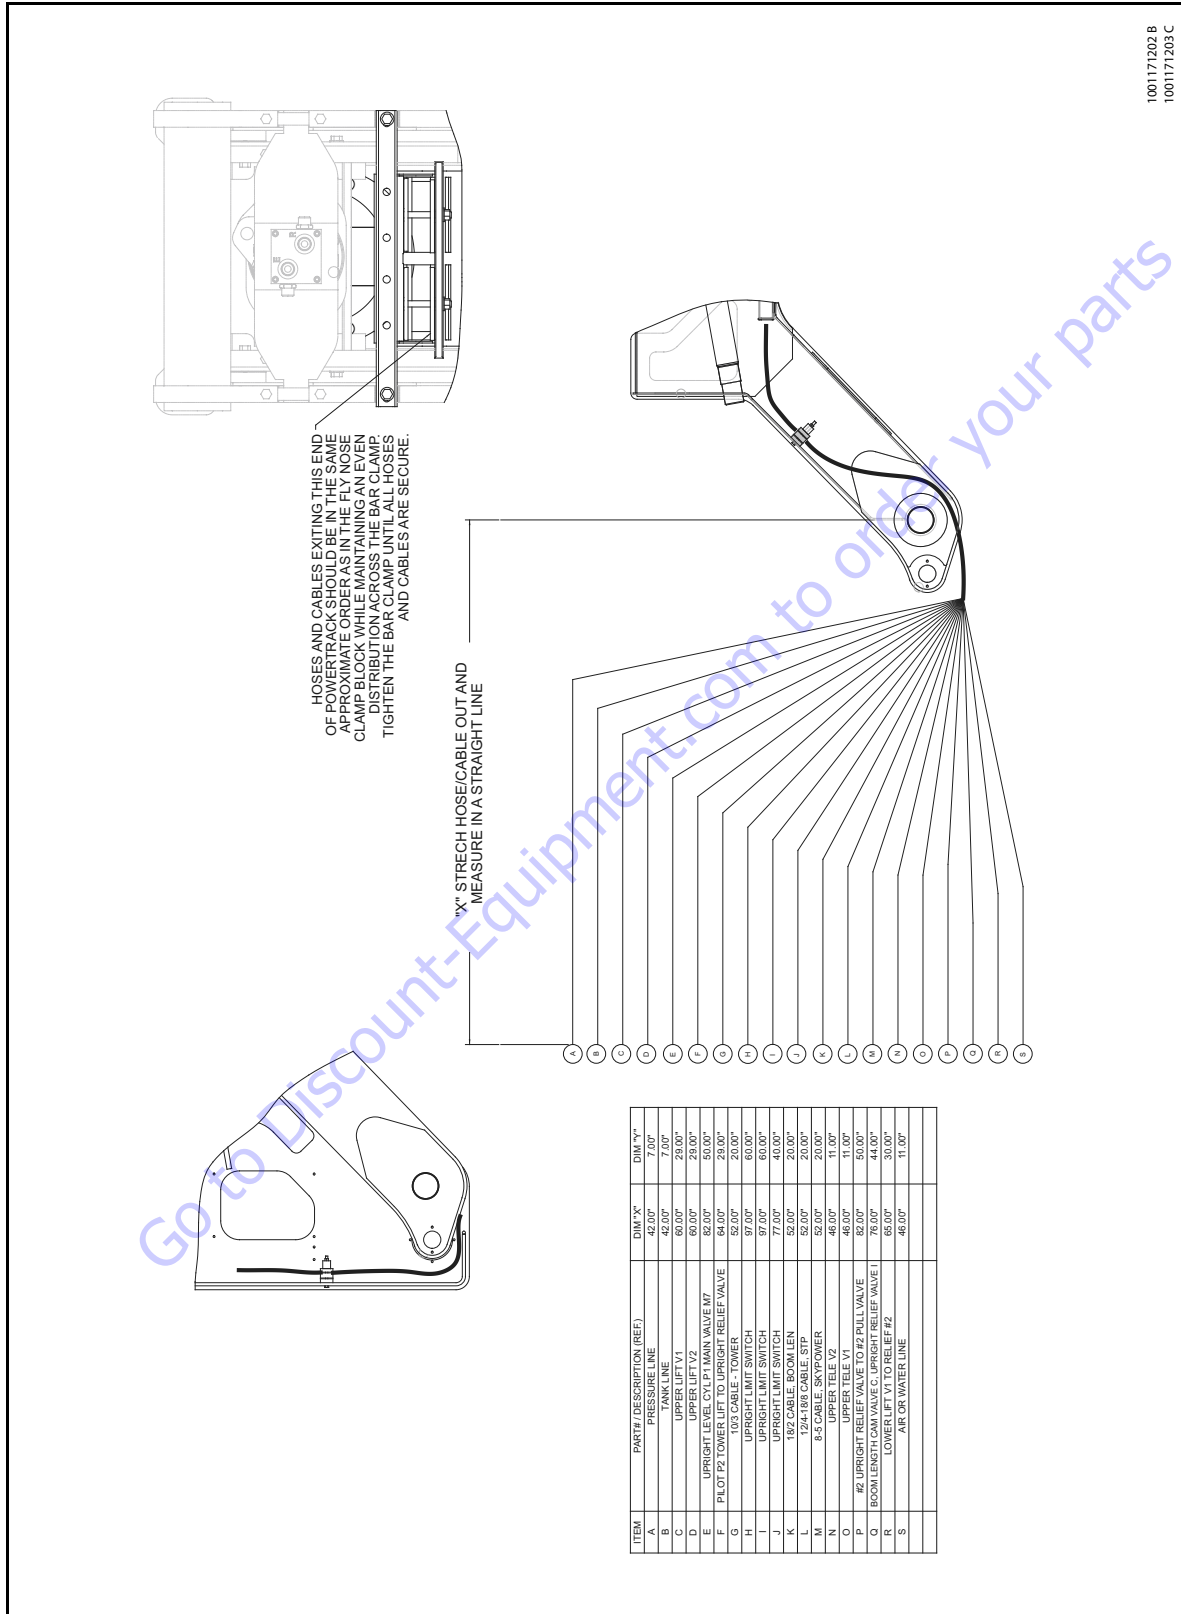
Powertrack Installation Tower Boom (Sheet 2 of 3)
